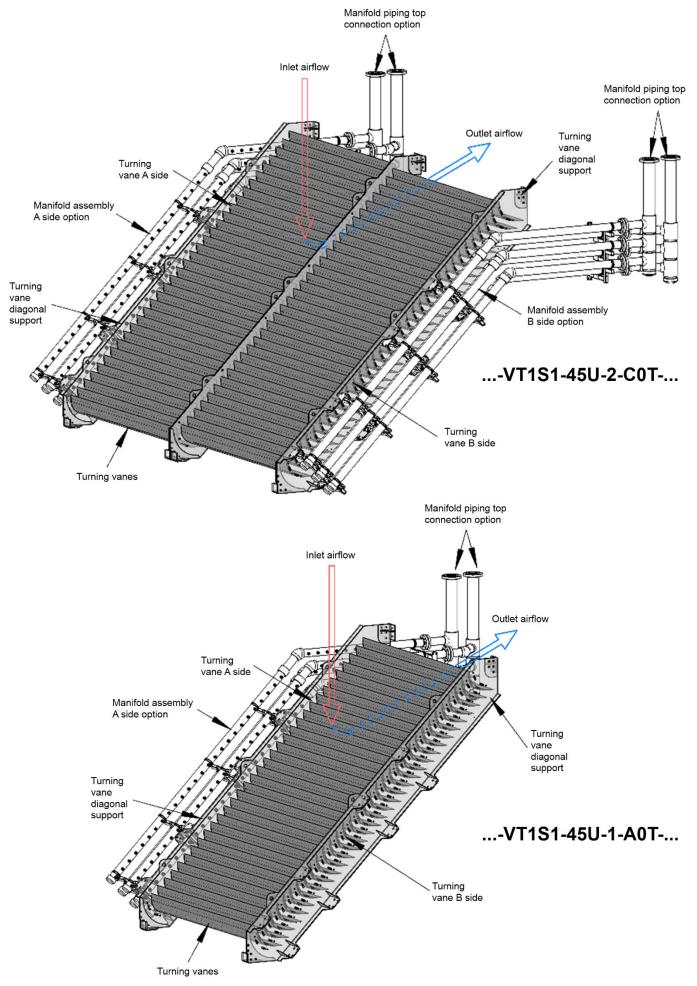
Turning section diagonal assembly (TTE-TSDA): 2-component example – manifolds on both sides. 1 - component example – manifold on A-side. A bottom piping connection is also possible.
